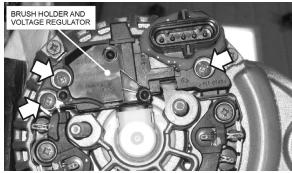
BOSCH HD10 BRUSH HOLDER MOUNTING SCREWS
